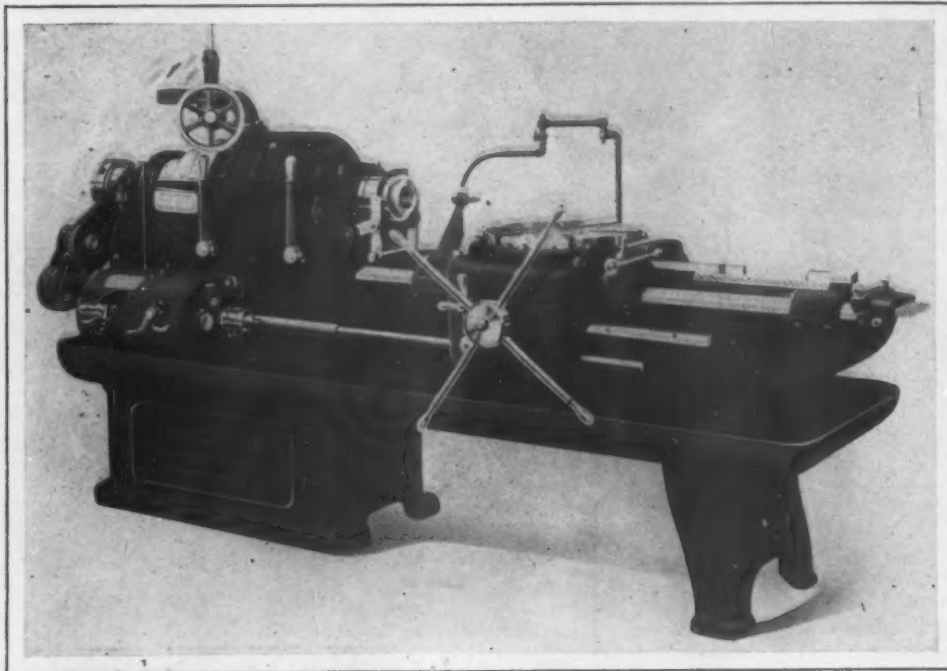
The New Flat Turret Lathe Built by the Modern Machine Tool Company, Cincinnati, Ohio
